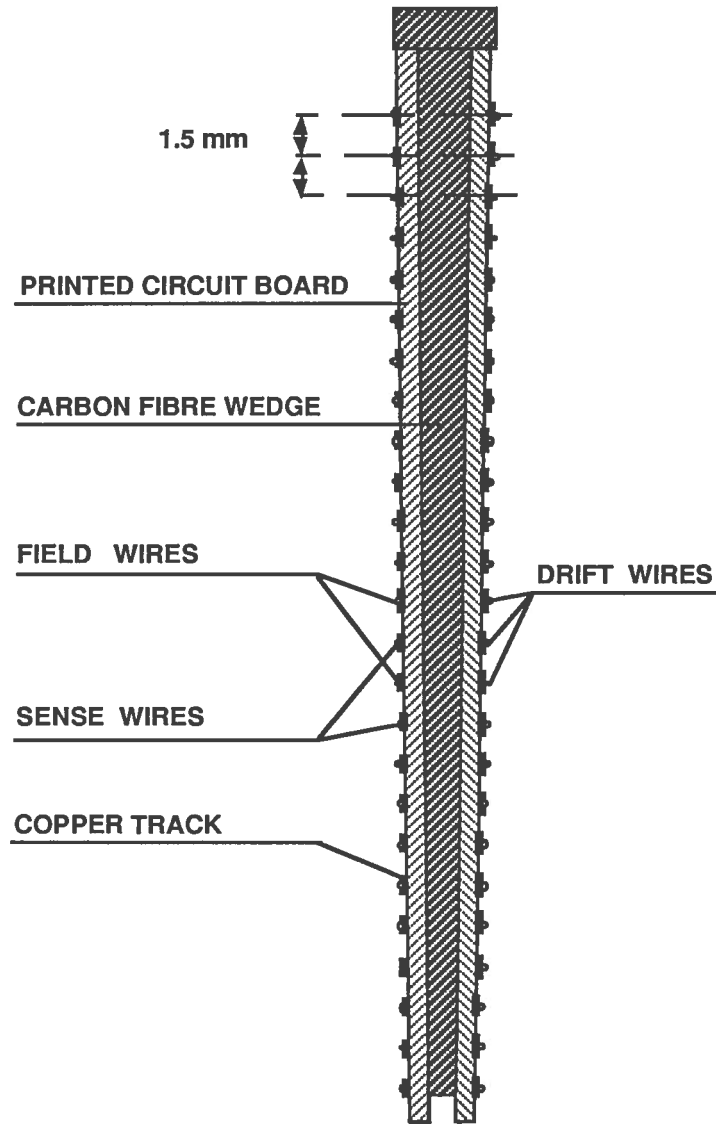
Section of a CF wedge with PCB and wires on it.
